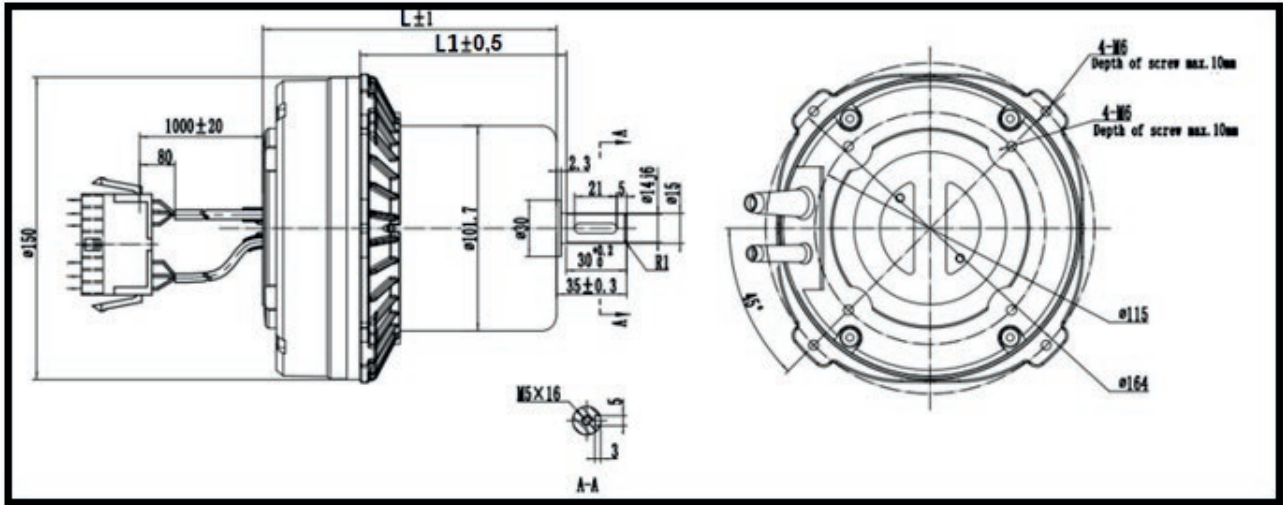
EC102 motor series DIMENSIONS (all dimensions are given in mm units)
